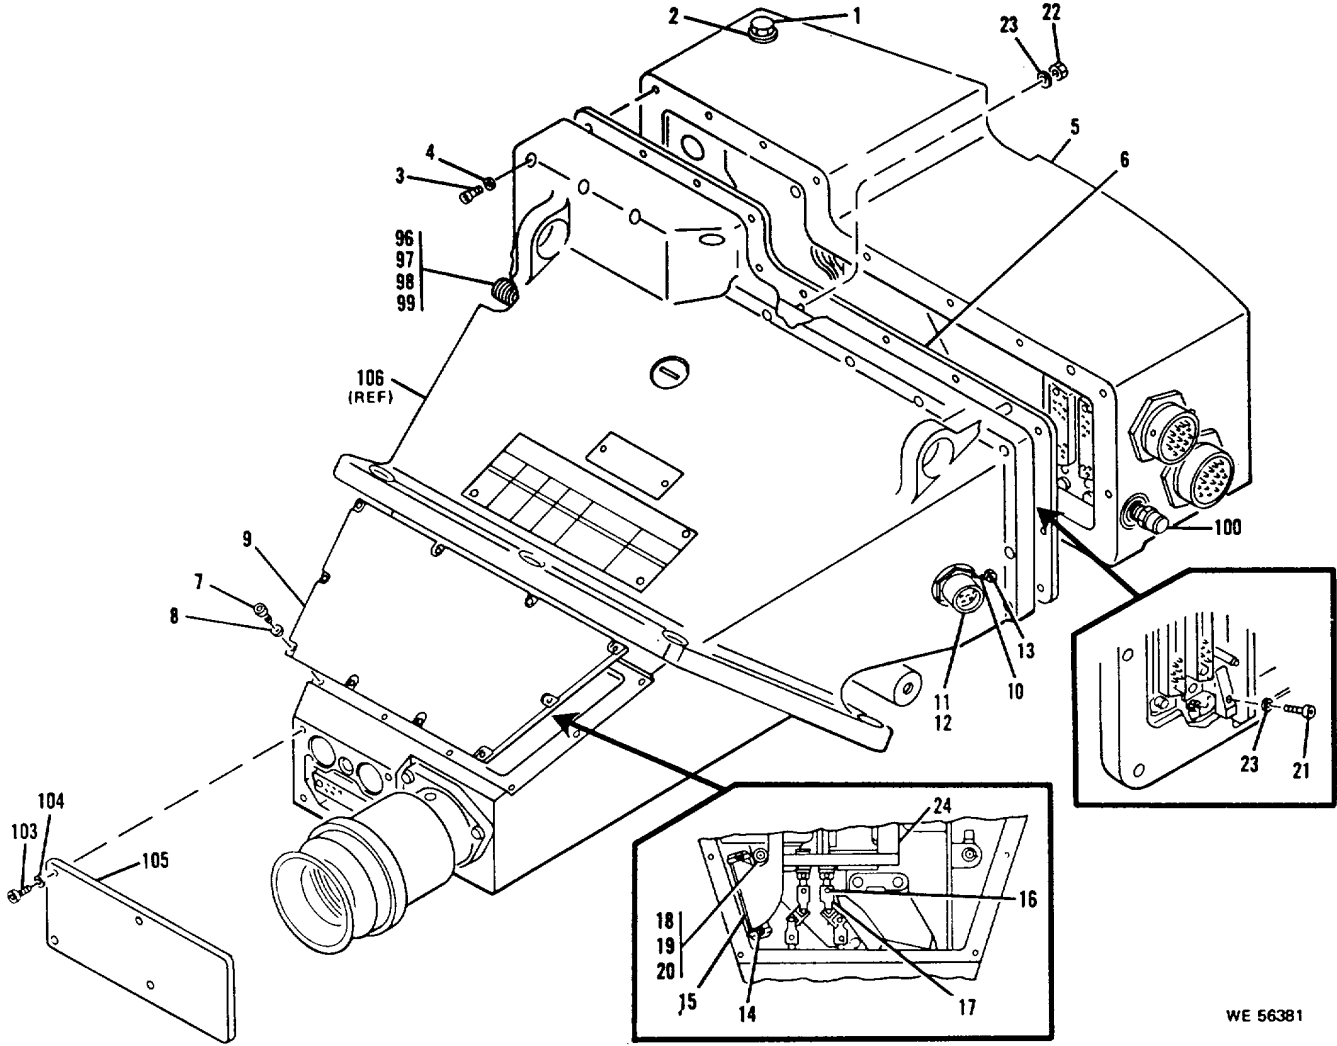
Disassembly of Laser Receiver-Transmitter RT-1021/VVG-1 (A76) (Sheet 1 of 3 sheets).
